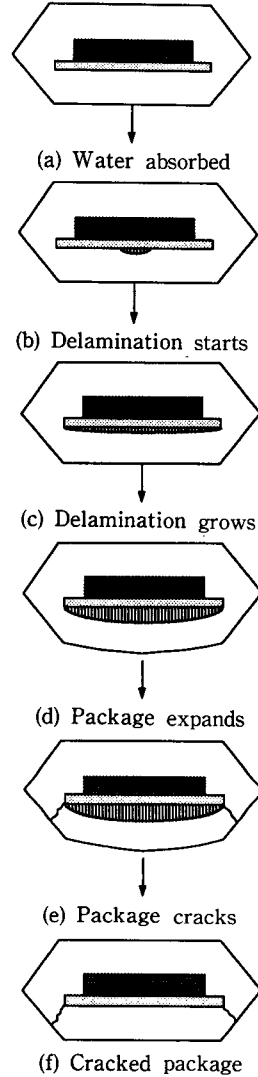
Mechanism for moisture-induced package cracking on surface mount attachment (Manzione⁽¹¹⁾)
